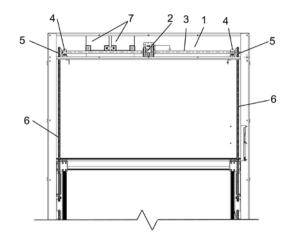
Drive of the closing/opening mechanism: 1 – top case profile; 2 – gear motor with a direct current electric drive; 3 – drive shaft; 4 – bearing support; 5 – chain sprockets; 6 – cable chains; 7 – emergency power supply batteries
